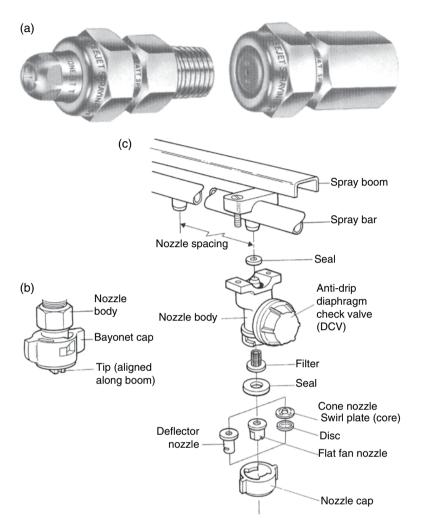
Hydraulic nozzles, male and female nozzle body (Photo: Spraying Systems Co). (b) Plastic nozzle with bayonet cap and diaphragm check valve (Hypro). (c) Exploded view of a nozzle assembly (Hypro).
